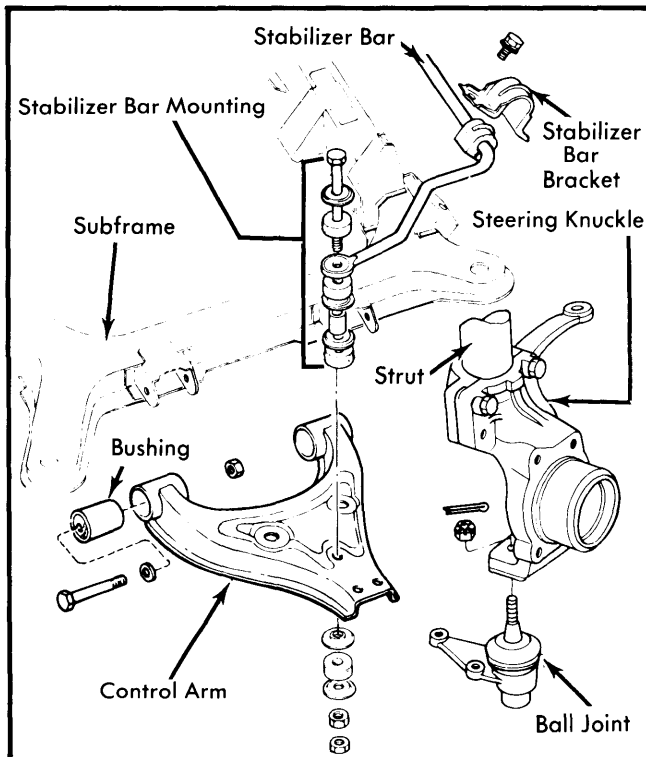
Exploded View of Control Arm and Stabilizer Bar
